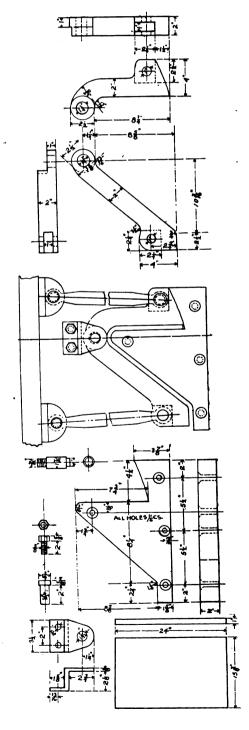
FOR BENDING RUNNING BOARD BRACKETS
